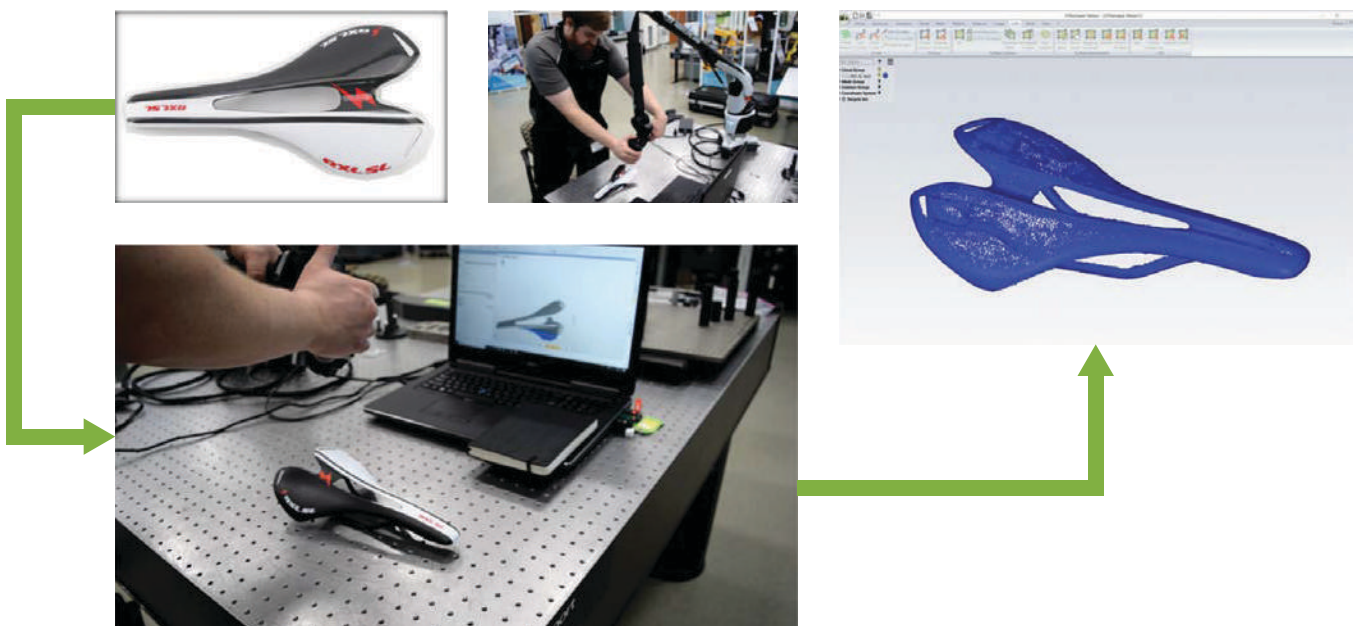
Process of Reverse Engineering the Arena Seat Saddle using a 3D Scanner
